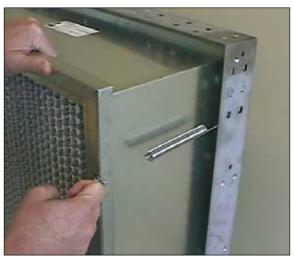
Spring latch should be pulled and fastened in hole in the header of the filter.
